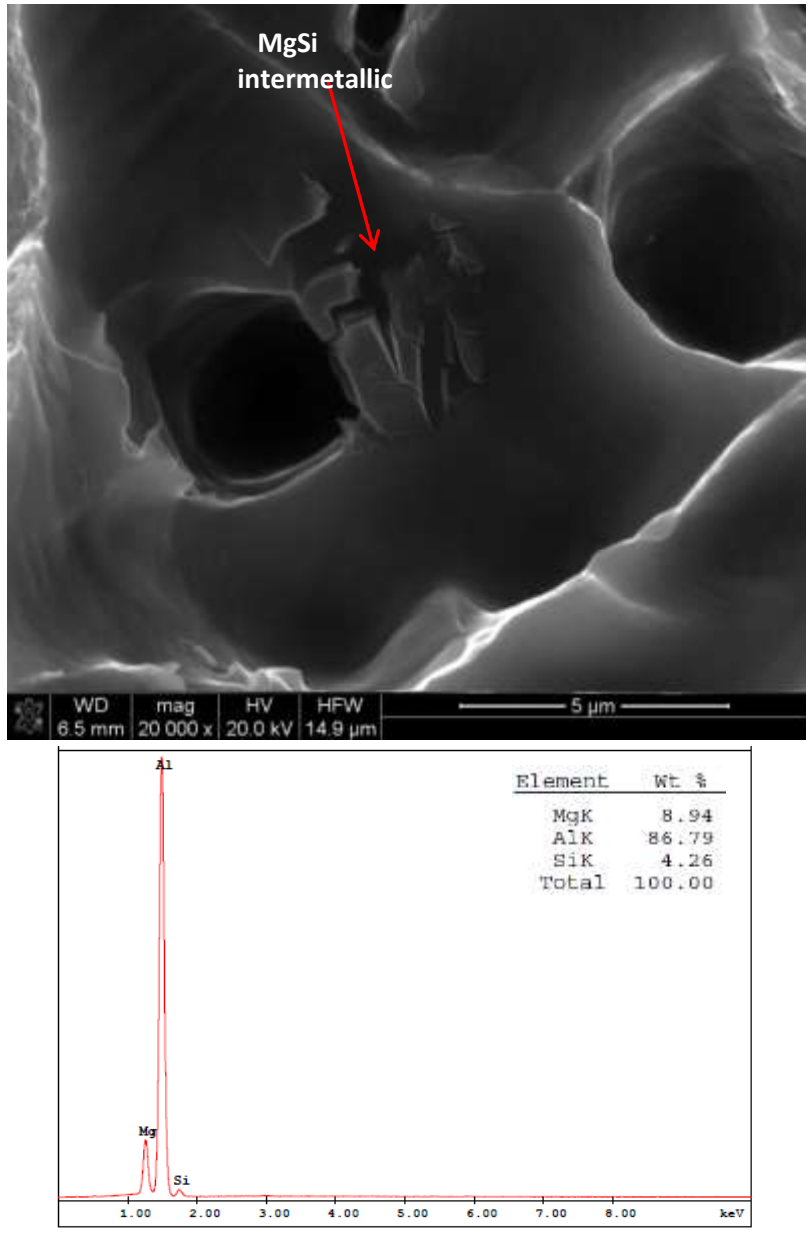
50 Fracture toughness SEM images of discontinuities in GMA welded metal
